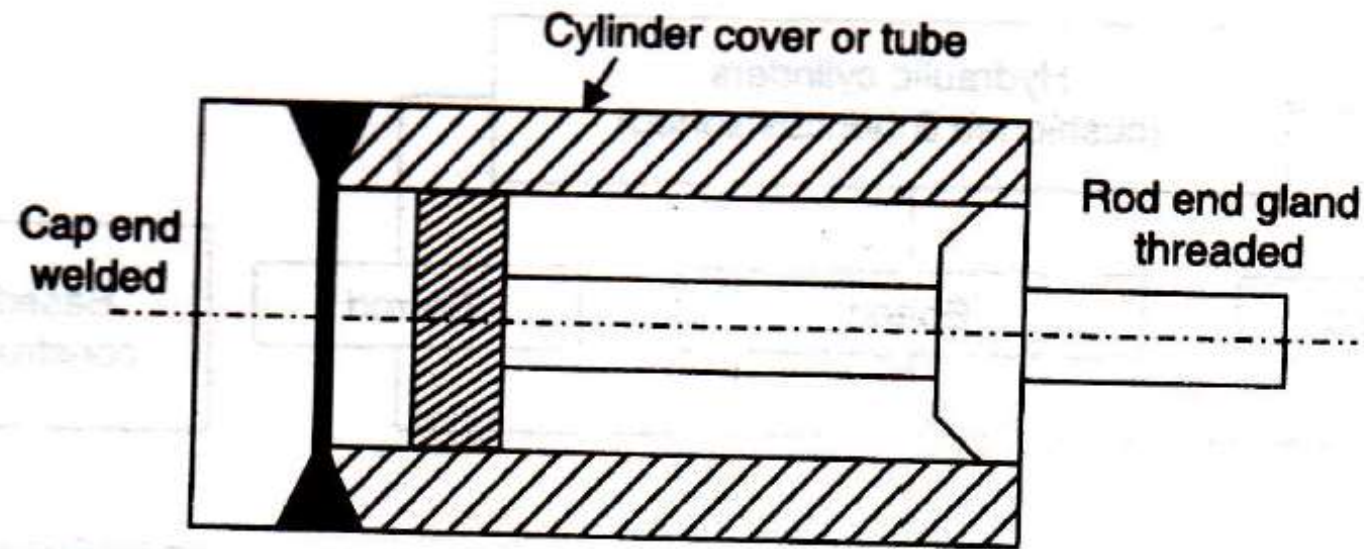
Welded construction with gland threaded at the rod.
